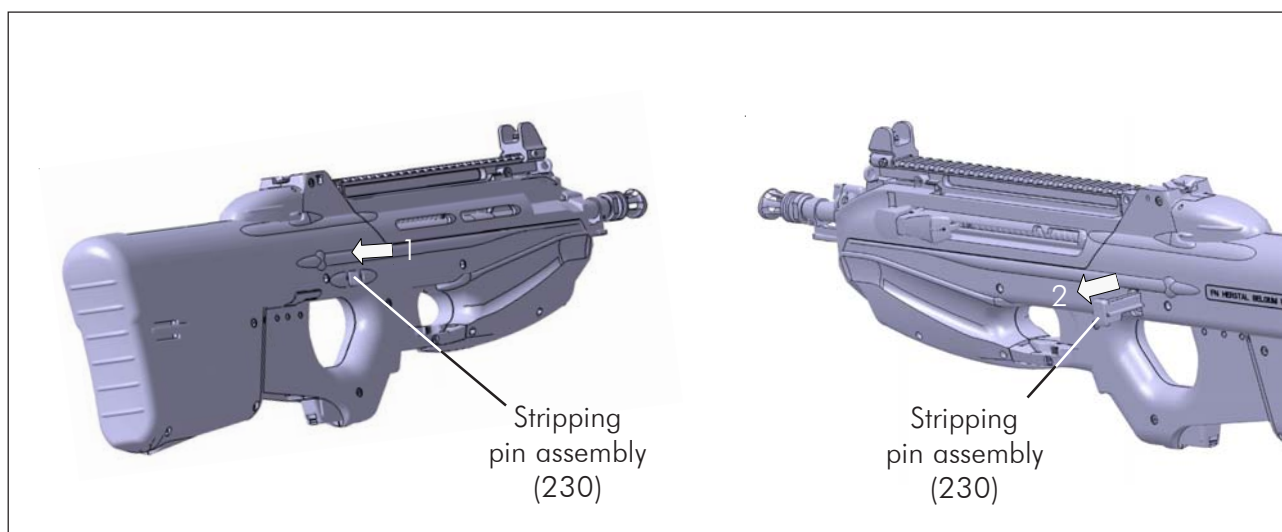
a - Releasing of the stripping pin assembly (230)
